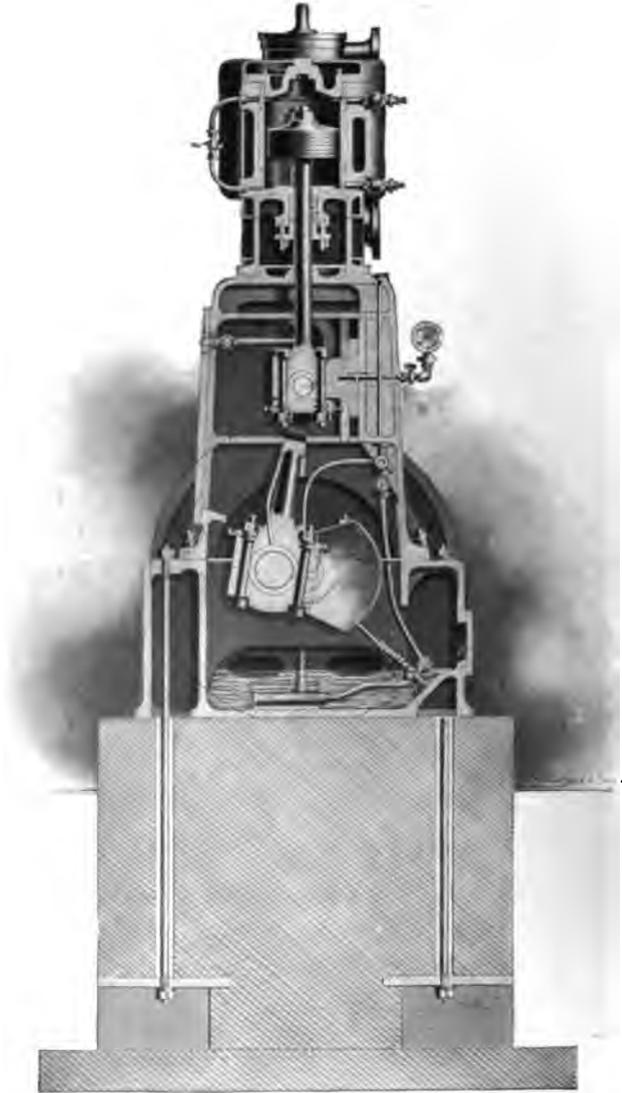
SECTIONAL END VIEW OF "B.L." QUICK SPEED ENGINE.
